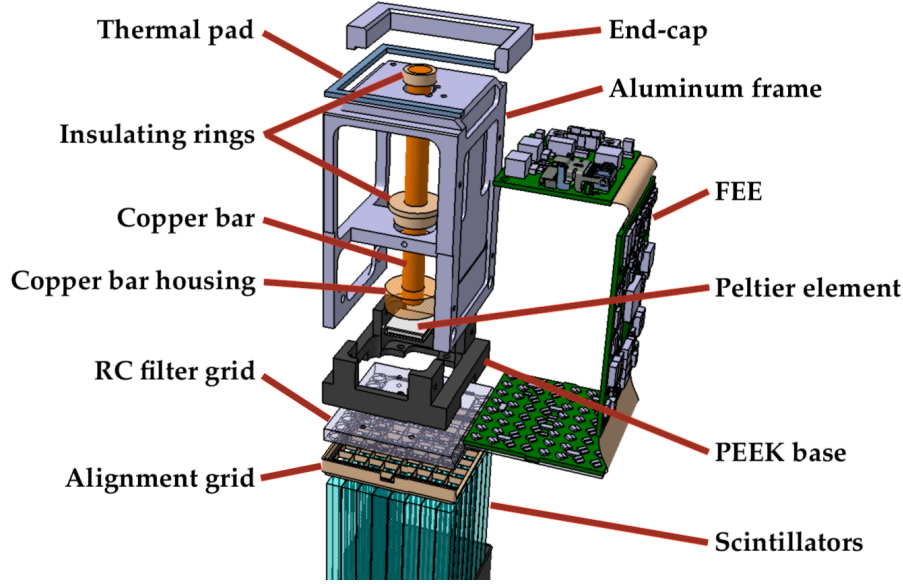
Image of how the front-end electronics is, as of the design in 2023, mechanically integrated in the POLAR-2 detector. The SiPM PCB and connector PCB parts are placed with a 90° angle with respect to the rigid PCB part which holds the main components. This part is mechanically coupled to an aluminum frame in order to thermally insulate it from the SiPMs. In this design the SiPMs are furthermore coupled to a Peltier element connected to a copper bar to remove heat. The SiPMs are connected to a plastic grid which provides precise alignment to the scintillator array (shown in blue at the bottom).
